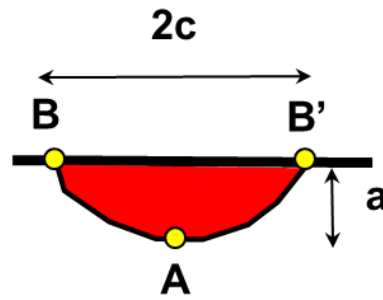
Schematic portrait of geometry of a semi-elliptical crack at weld toe
